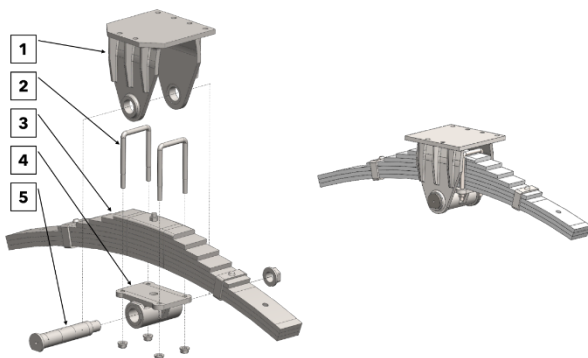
CAD model and exploded view of bogie suspension system (1) Chassis bracket, (2) U-bolt, (3) Leaf Spring, (4) Bogie-pin flange, (5) Bogie pin
